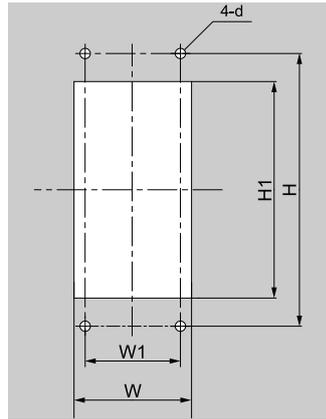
Panel Cut-Out Dimensions to Attach Inside Control Panel
